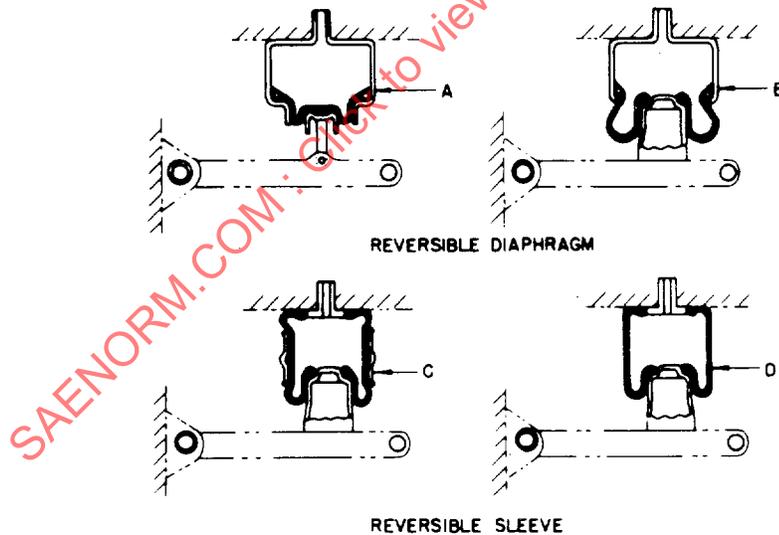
PISTON TYPE PNEUMATIC SPRINGS
